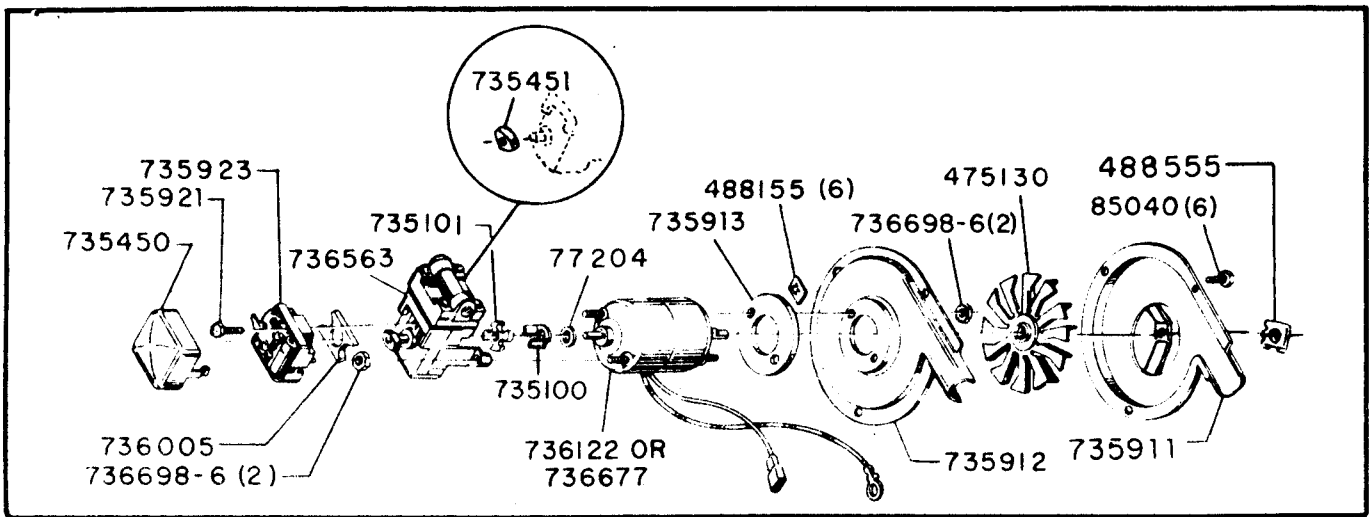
COMBUSTION AIR BLOWER ASSEMBLY 737191-1
